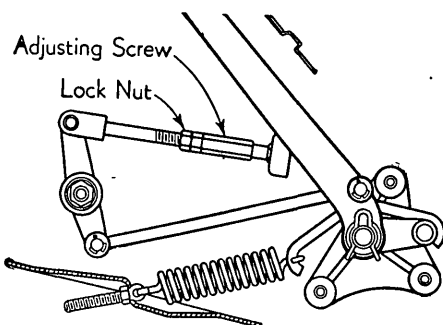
Clutch pedal adjustment, 1941 thru 1949
